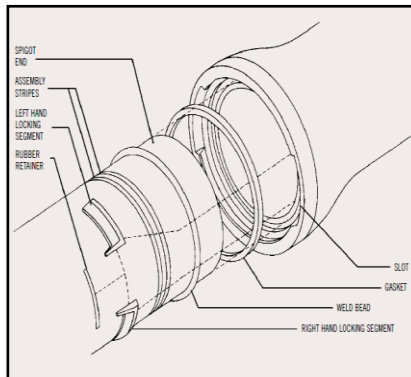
Assembled TR FLEX® Pipe Joint - Typical 4" - 36" Sizes
